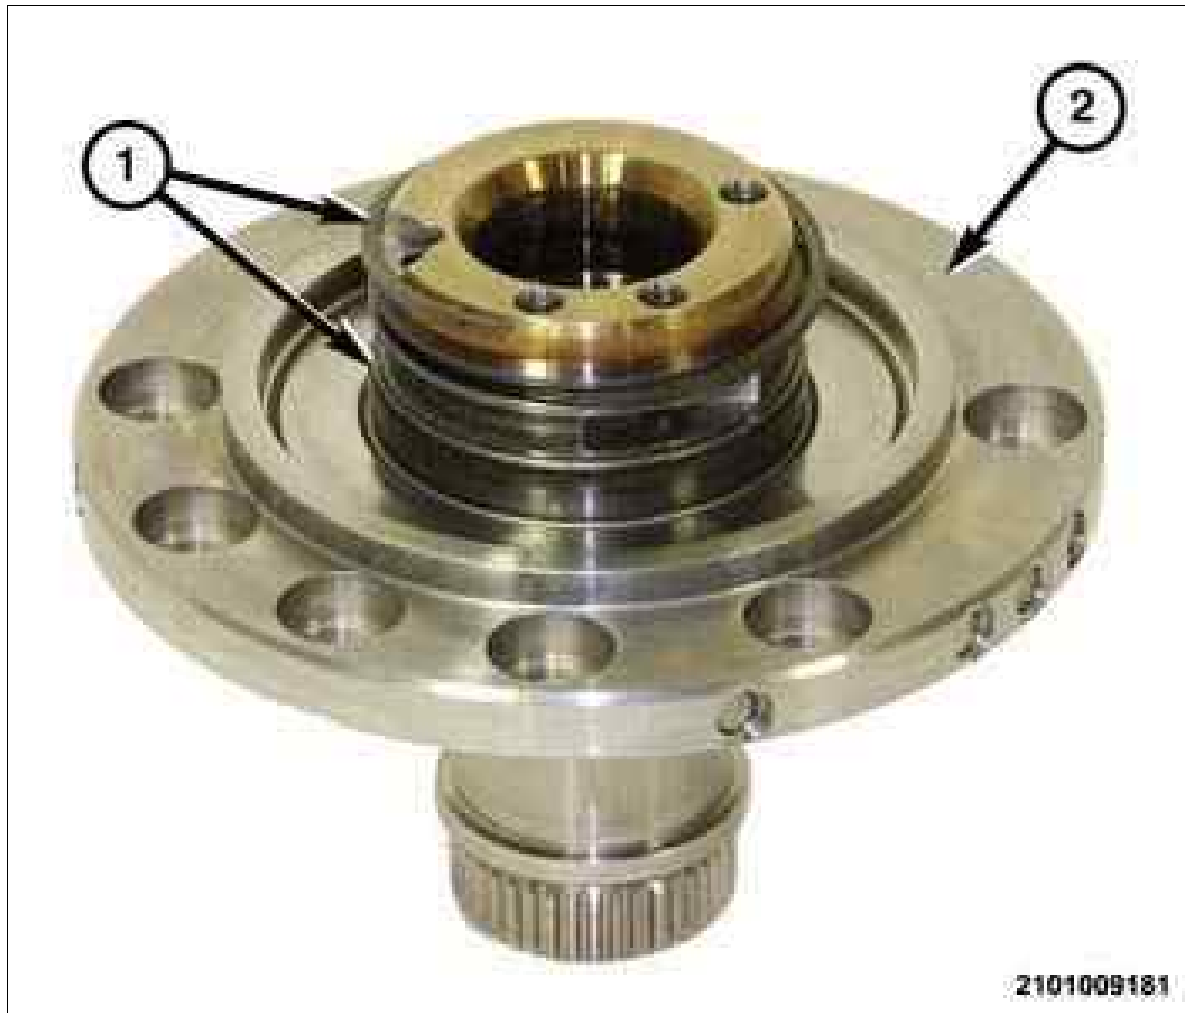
Removing/Installing Seal Ring At Ring Land In Outer Reaction Shaft Hub
